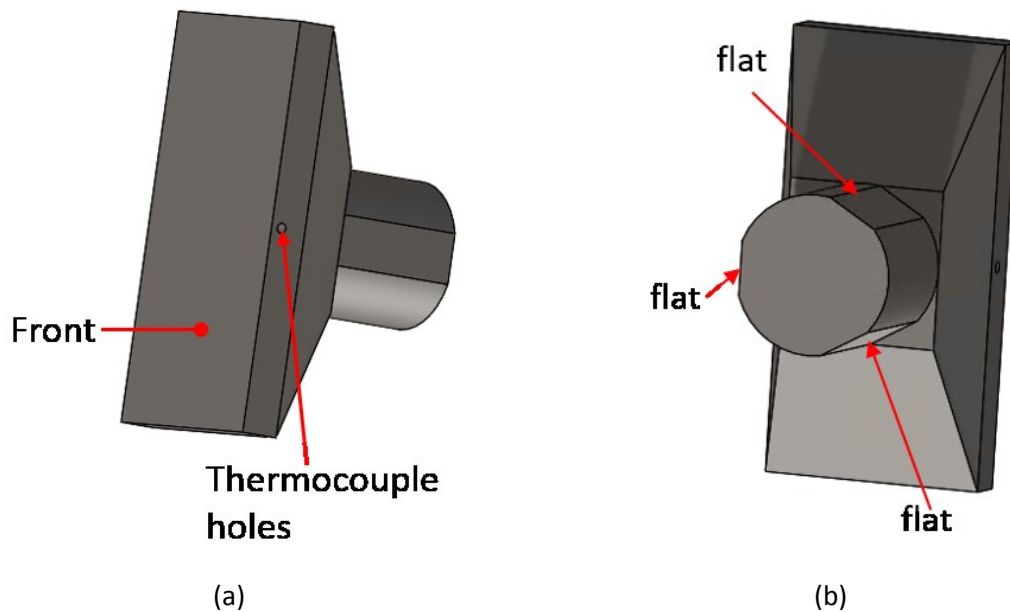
Punch and die (improved version): (a) front; (b) back.
